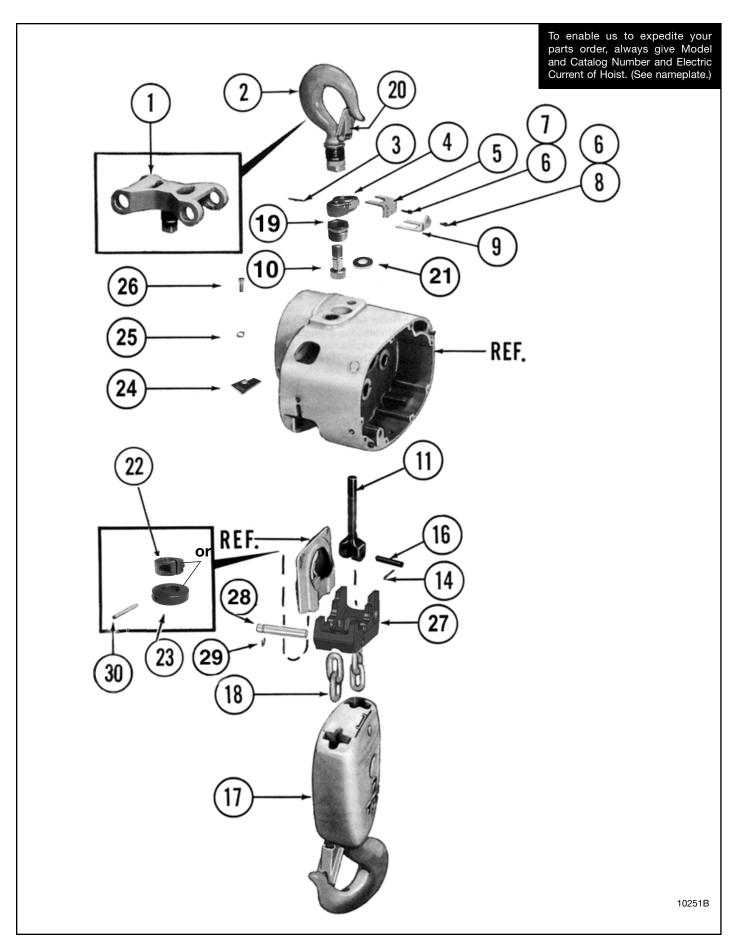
UPPER SUSPENSION, LOAD CHAIN AND LOWER BLOCK PARTS (2 Ton Hoists)
